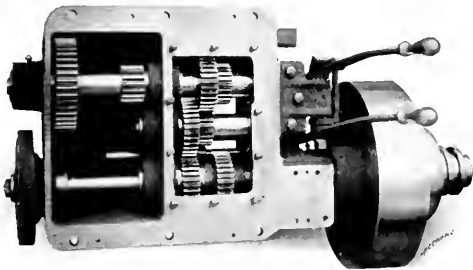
Gear-box Unit for Machine with Single Pulley Drive
